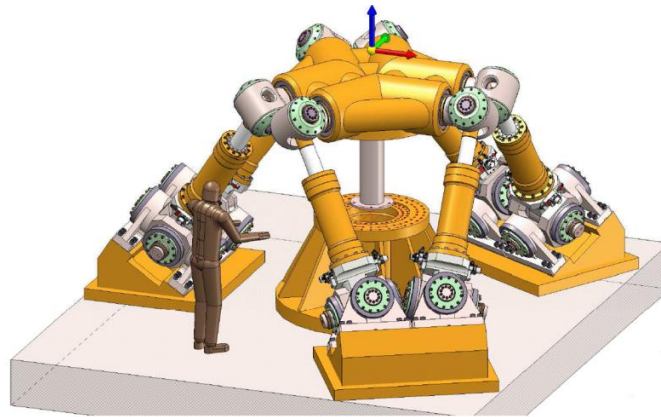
Hexapod to test multi-axial fatigue [28].
